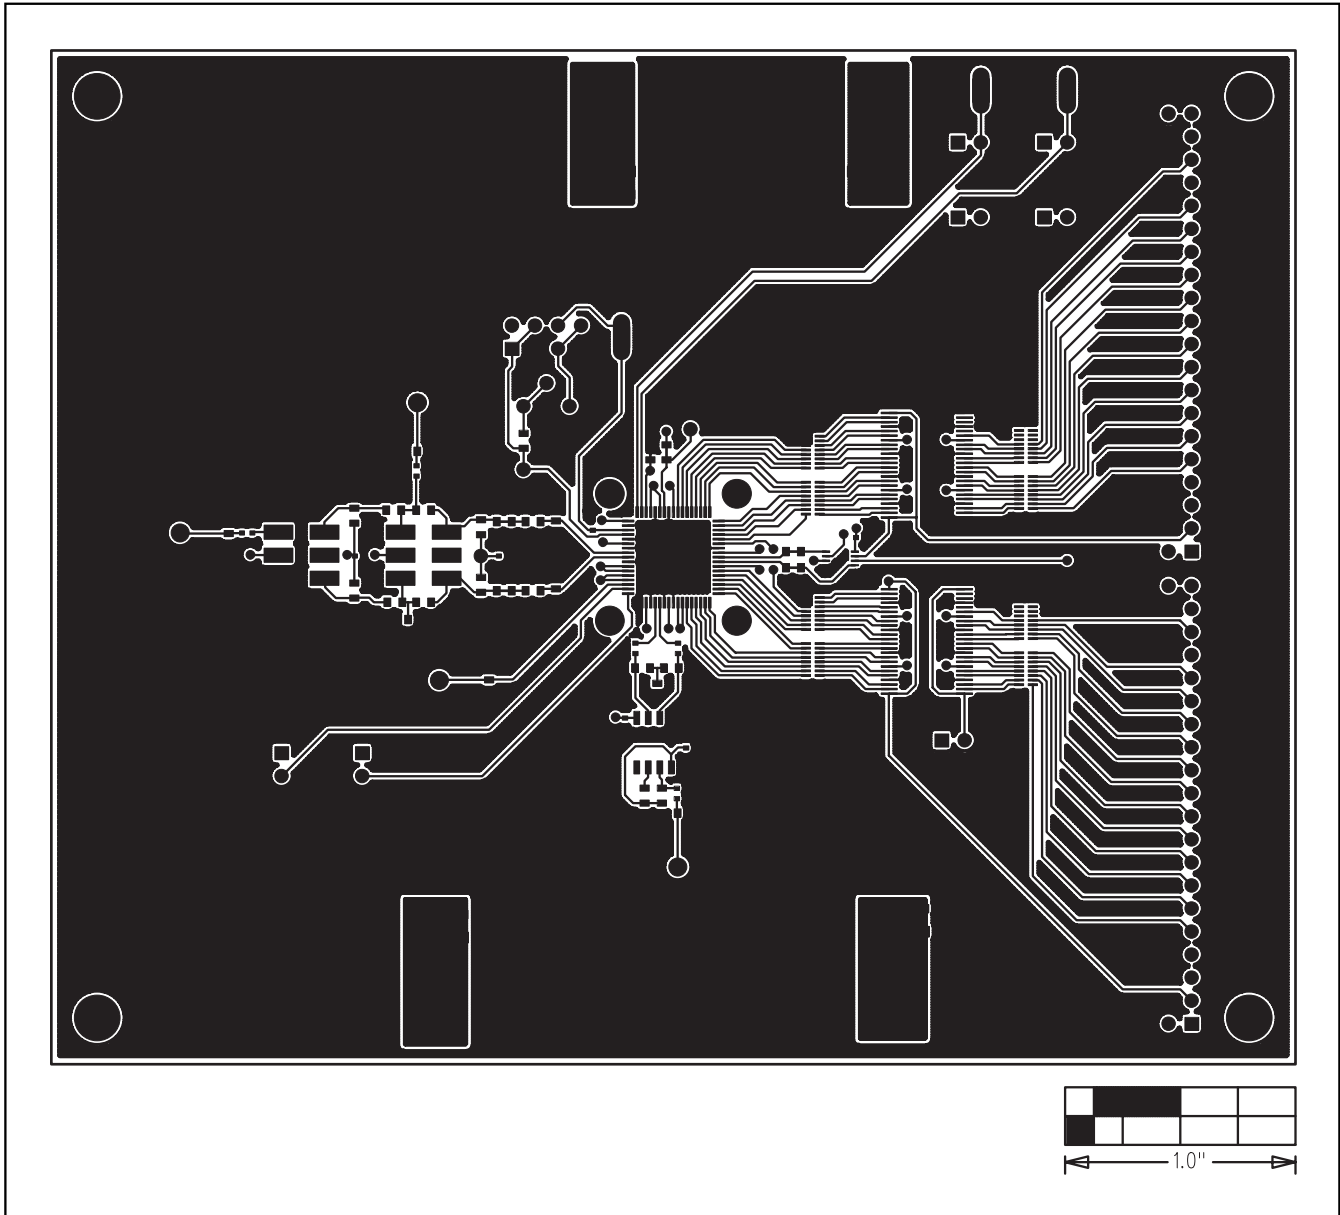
MAX19542 EV Kit PC Board Layout—Component Side
